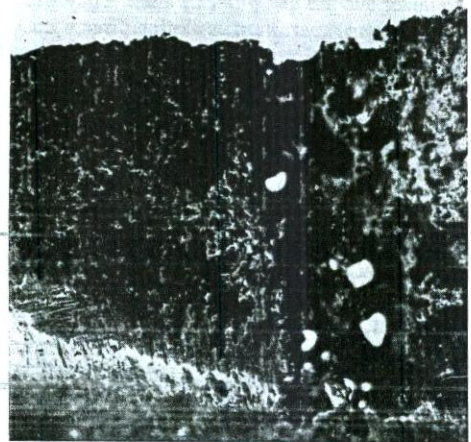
Leading edge of a series 400 stainless steel impeller for a boiler feed pump showing deep local damage caused by cavitation erosion
